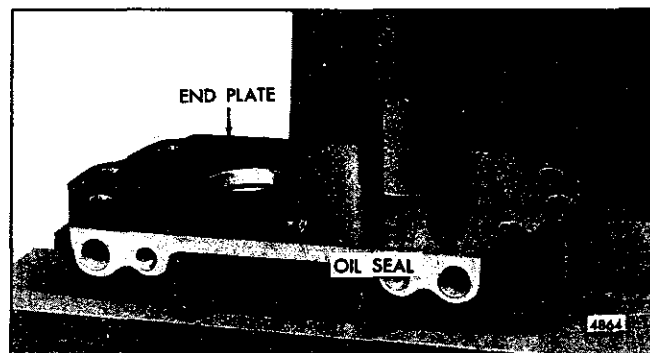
Installing Lip Type Oil Seal in End Plate with Tool J 22576
